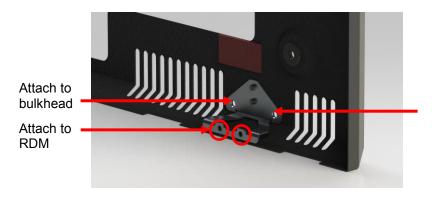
1901-, 2401-, 2201-, and 2601-800 cosmetic back mounting tabs
